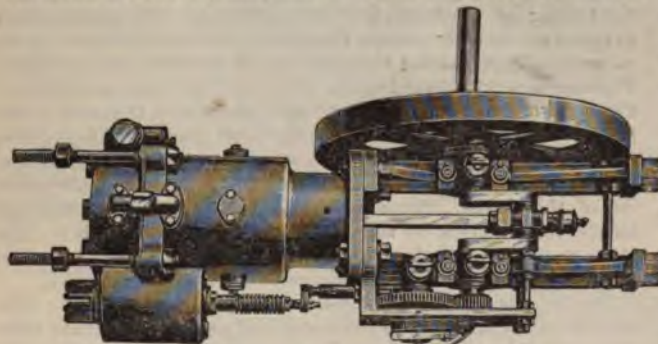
"OUPREY" PETROLEUM MOTOR.
